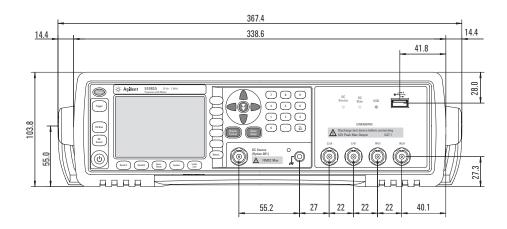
Dimensions (front view, with handle and bumper, in millimeters, nominal)
